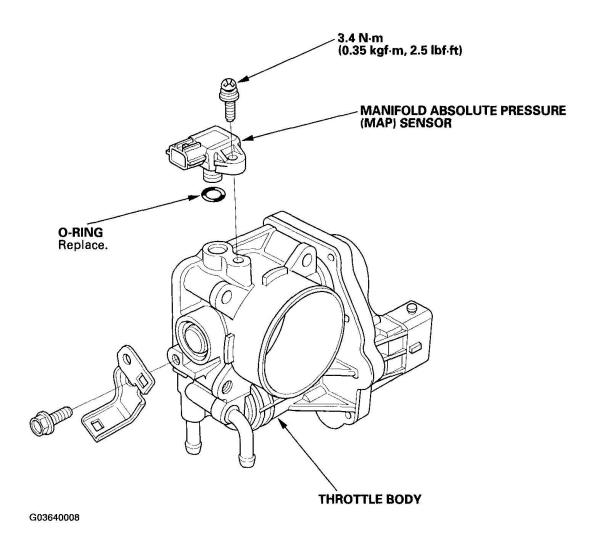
Disassembly/Reassembly Of Throttle Body Courtesy of AMERICAN HONDA MOTOR CO., INC.
